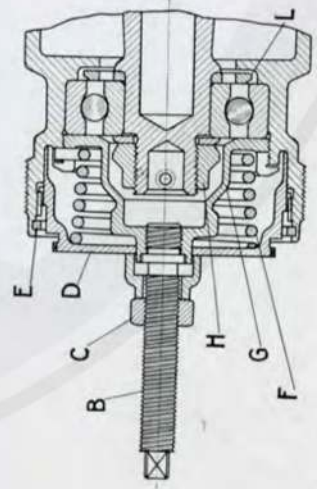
TOOL IN POSITION FOR REMOVING LOCKING RING.
